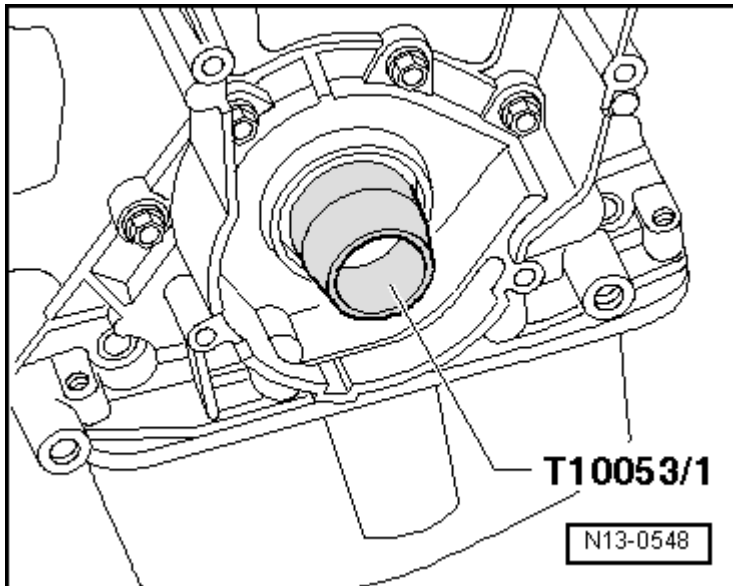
Identifying Guide Sleeve T10053/1 Fitted Onto Crankshaft Journal
